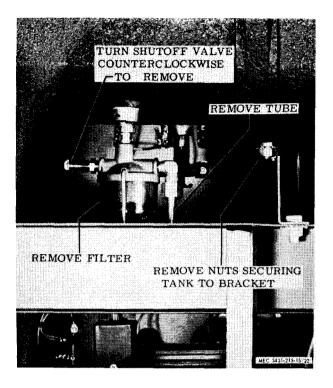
Fuel tank and shut-off valve, removal and installation.
